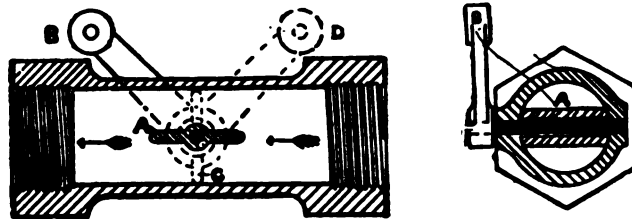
THE BUTTERFLY THROTTLE VALVE.
